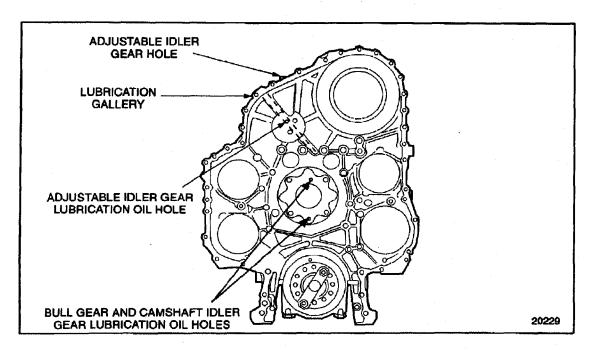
Gear Train Lubricating Oil Hole Locations
